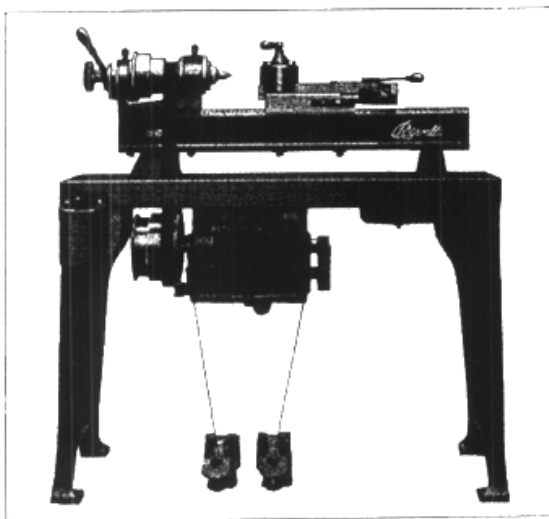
Rivett Series 505 ball-bearing high-speed lathe on Oil Pan and Floor Legs with Speed Box Motor Drive and Latch Treadles. Weight (Oil Pan and Floor Legs only), 250 lbs.
